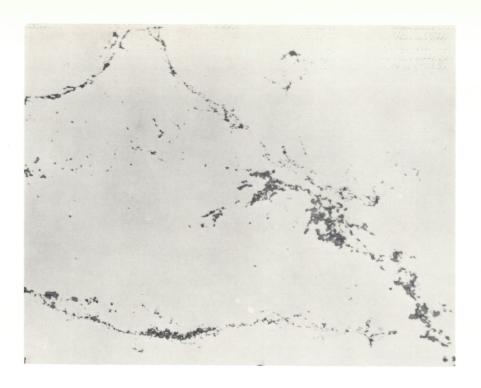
Cross Section Near Fracture Origin of Crankshaft in Fig. 22 Showing Small Portion of Inclusion Concentration and the Striated or Laminar Nature of these Non-Metallic Inclusions. Magnification 100X
